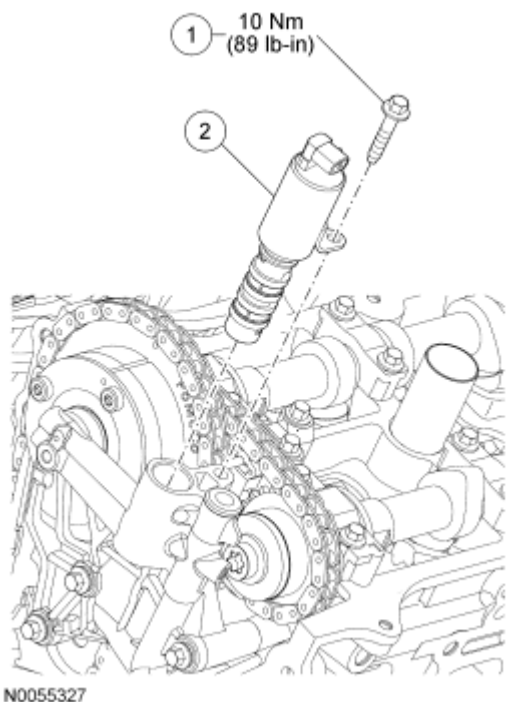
Exploded View Of Variable Camshaft Timing (VCT) Oil Control Solenoid With Torque Specification
